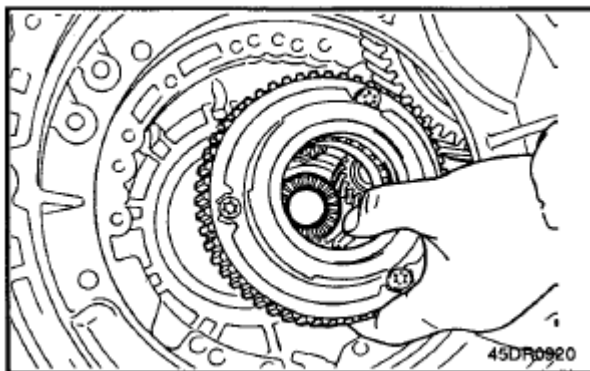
Removing Planet Carrier Assembly & Thrust Bearing
